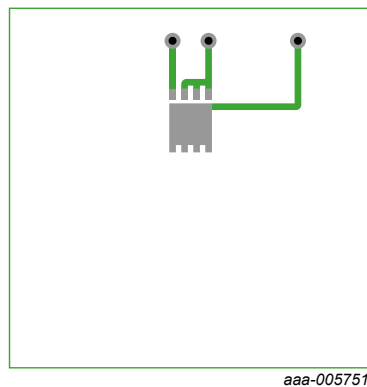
PCB layout for thermal resistance junction to ambient minimum footprint; FR4 board; 2oz copper
